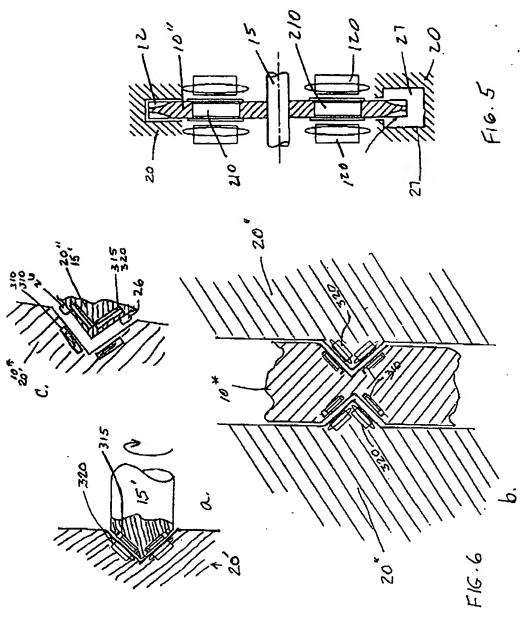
and 6b are fragmentary sectional illustrations of the shaft and the regenerative rotor disk, respectively, rotatably supported on conical magnetic bearings in the housing; and
